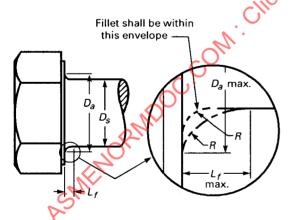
FILLET DETAIL FOR LONG SCREWS
